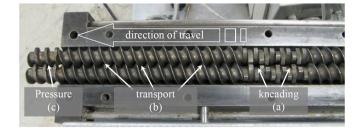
Thermal extrusion machine with the top removed to expose part of the twin screws showing some of the: (a) kneading, (b) transport and (c) pressure element sections of the twin co-rotating screws.
